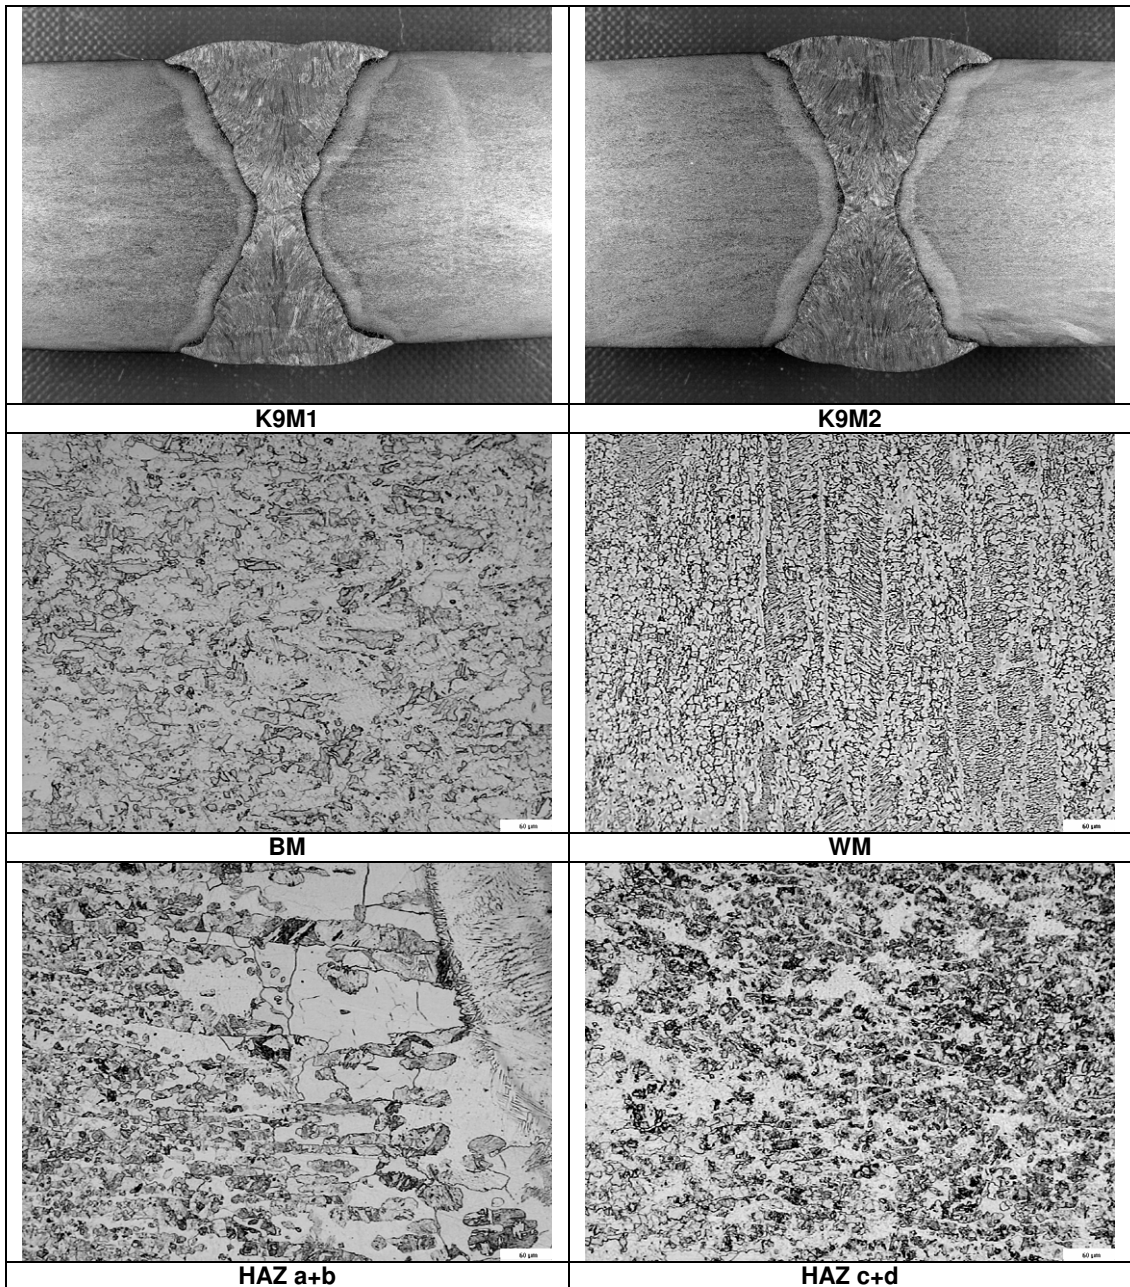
Macro and microphotographs of 30 mm thick SMAW weld with 309 filler metal (K9).
